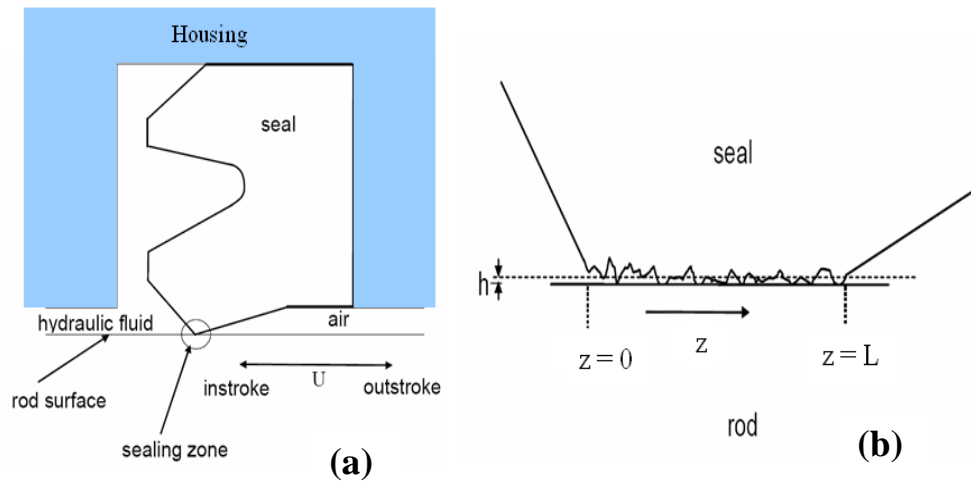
(a) Schematic of the mounted seal. (b) Magnified sealing zone.
